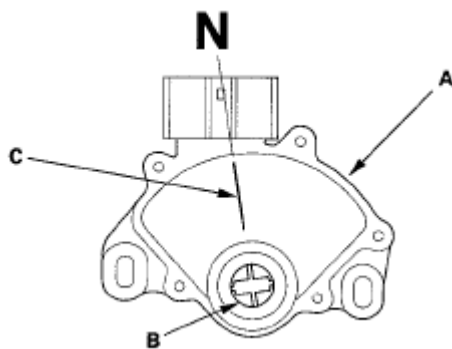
Aligning Selector Control Shaft Hole With N Line
